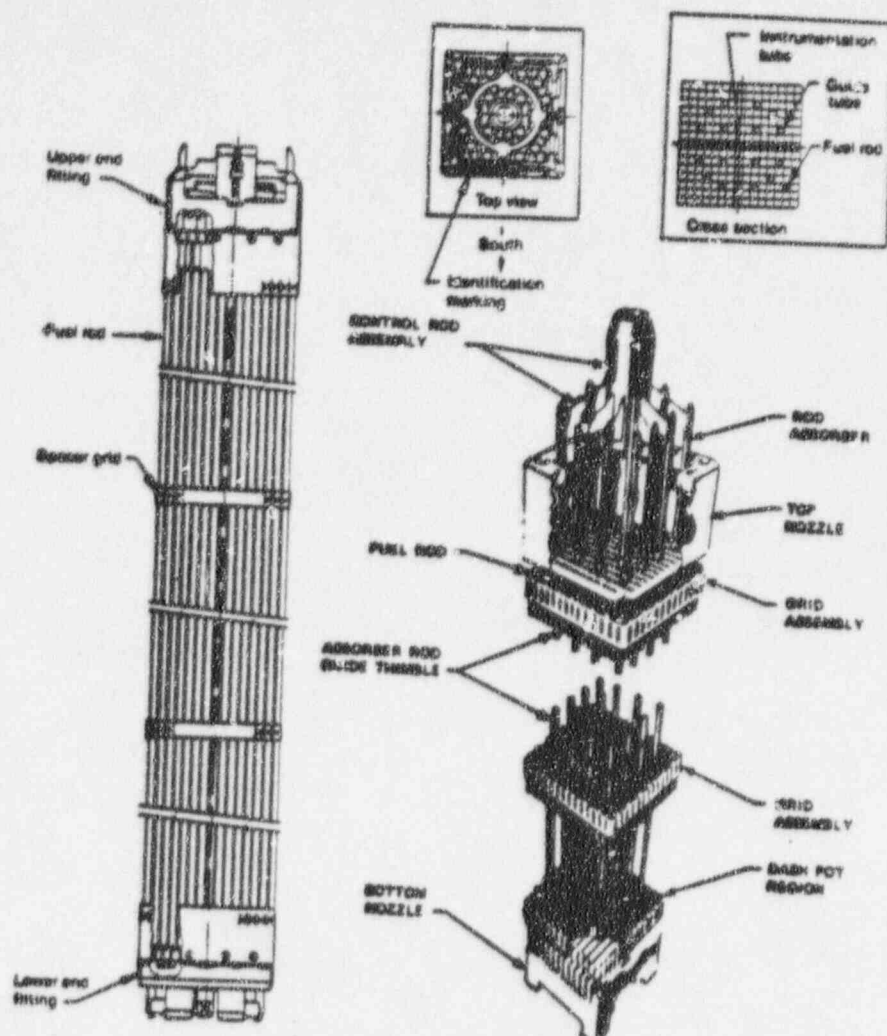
Illustration of a typical PWR fuel assembly incorporating a spider-like absorber assembly with control rods that move within guide tubes (thimbles).
